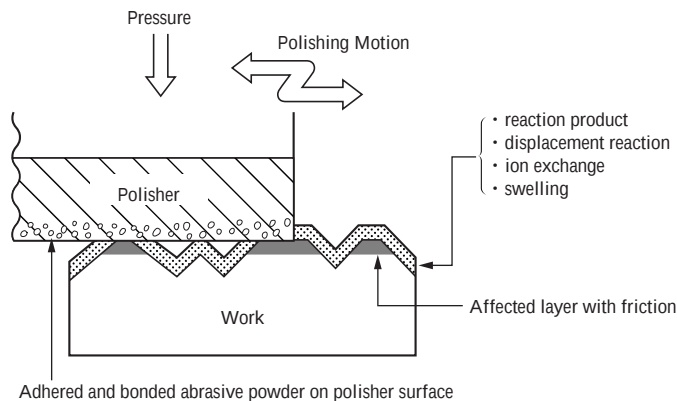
Surface-smoothing model accompanying with soft film forming and mechanically removing.
